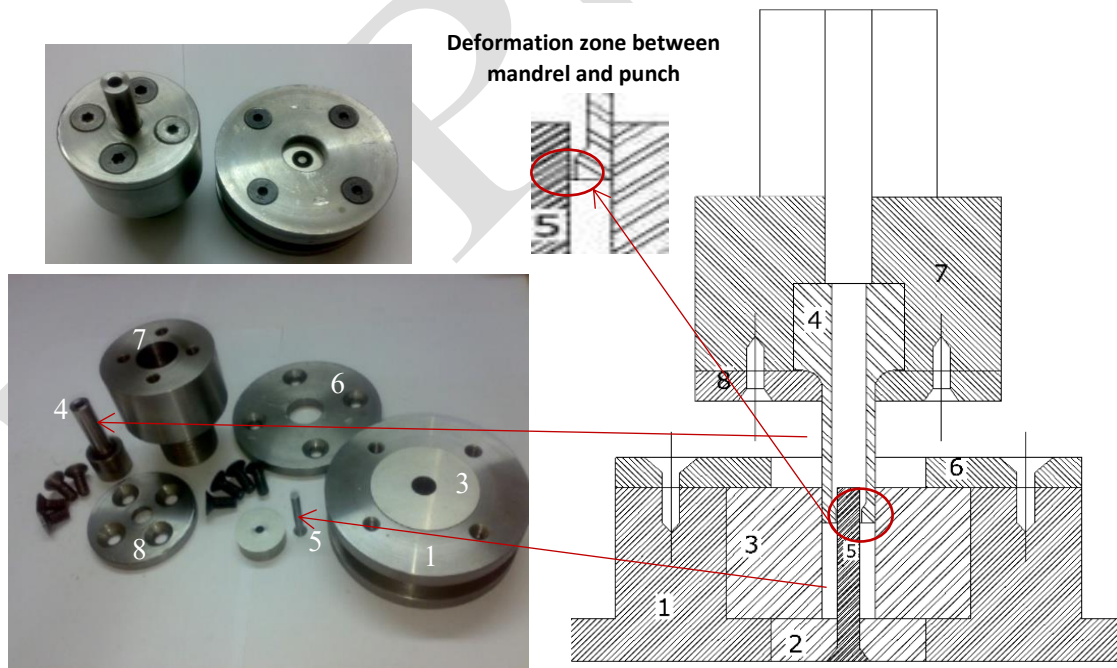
Backward extrusion die parts and assembly setup: Punch: No. 4, Punch holder: No.7&8, Die: No. 2 &3, Mandrel: No. 5, Die Holder:1,6
